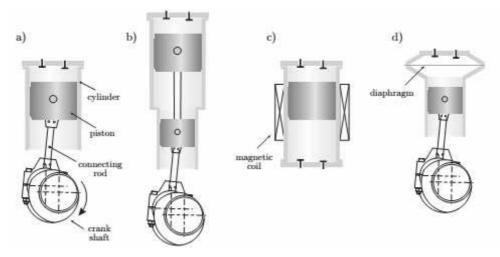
Different compressor types: a – crank driven, b – crosshead, c – free moving piston, d – diaphragm
